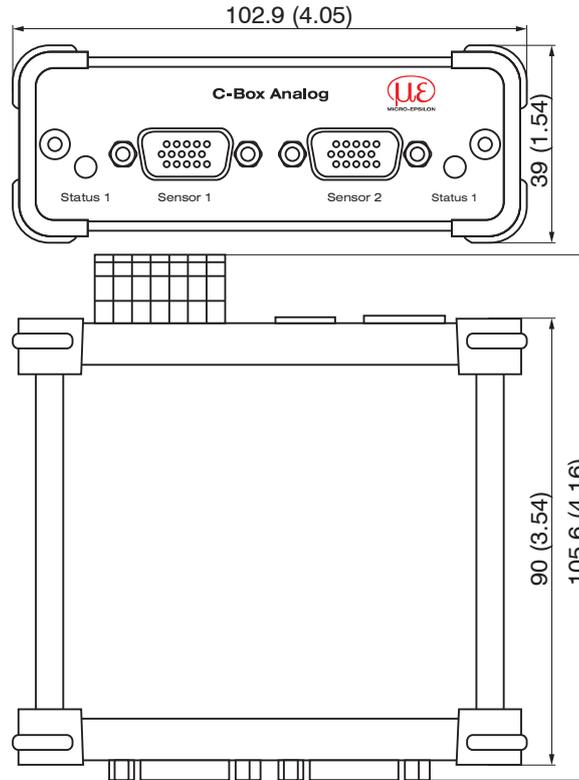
Dimensions C-Box, dimensions in mm (inches), not to scale
